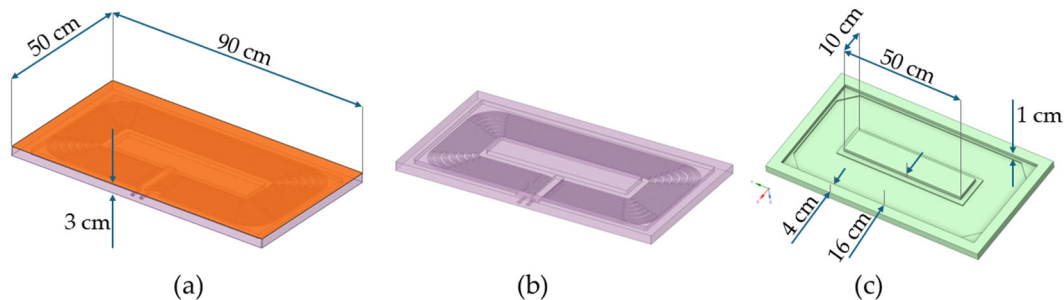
Geometry of the charging unit (CU): (a) upper view of the real CU housing (90 cm × 50 cm × 3 cm); (b) lower view showing the real internal cavity; (c) simplified CU geometry used for FEM simulations, where curved surfaces and coil details were removed to optimize mesh generation.
